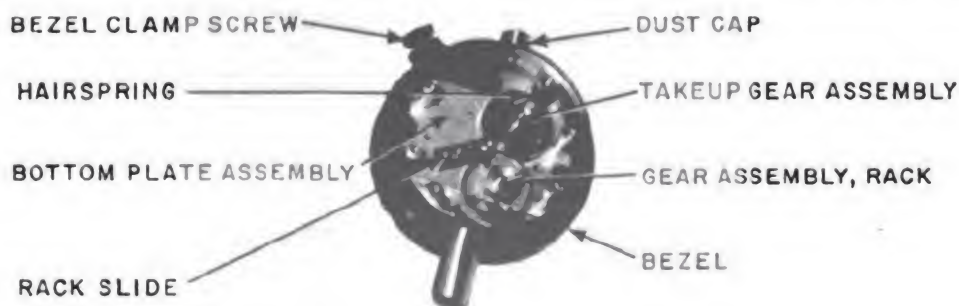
Mechanism of a Federal dial indicator in the case (top plate and rack removed).
